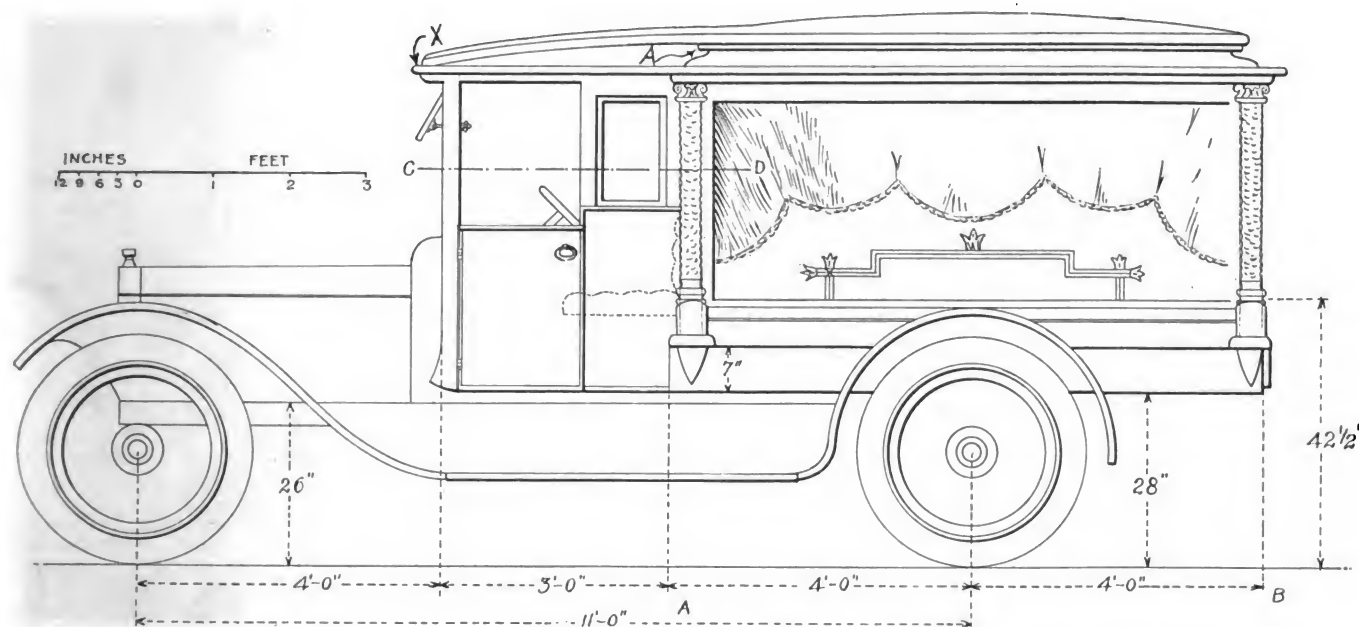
SIDE VIEW AND DIMENSIONS OF HORSE-DRAWN HEARSE BODY ADAPTED TO PIERCE-ARROW CHASSIS
